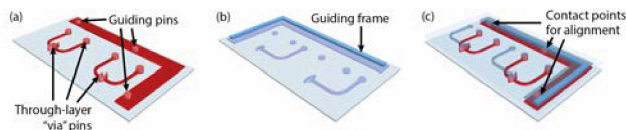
Self-aligning molds using guiding structures. (a) Bottom mold containing guiding pins, bottom structures, and pins defining vias. (b) Top side molds containing guiding frame and top structures. (c) Bottom and top molds automatically aligned by contacting the guiding frames with the guiding pins. The valves, channels and the self-aligning features on the molds are oversized for illustrative purposes.
